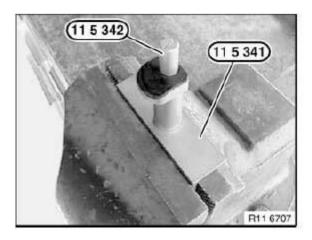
Identifying Special Tool 11 5 341 And 11 5 342 Courtesy of BMW OF NORTH AMERICA, INC.
